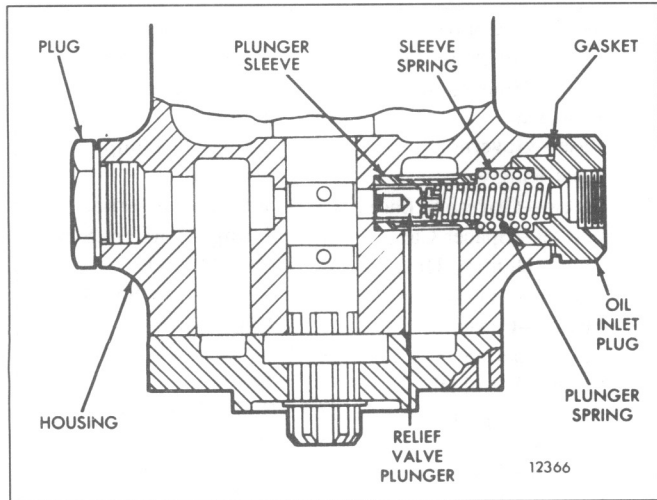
Location of Oil Relief Valve Plunger, Plunger Sleeve, Springs, Oil Inlet Plug and Dummy Plug
